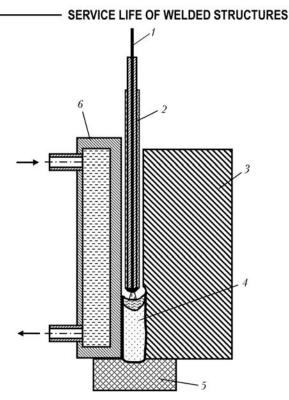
Flow diagram of the process of electric arc hardfacing with embedded electrode: 1 - welding wire; 2 - embedded electrode; 3 - part being clad; 4 - deposited metal layer; 5 - backing; 6 - water-cooled mould
